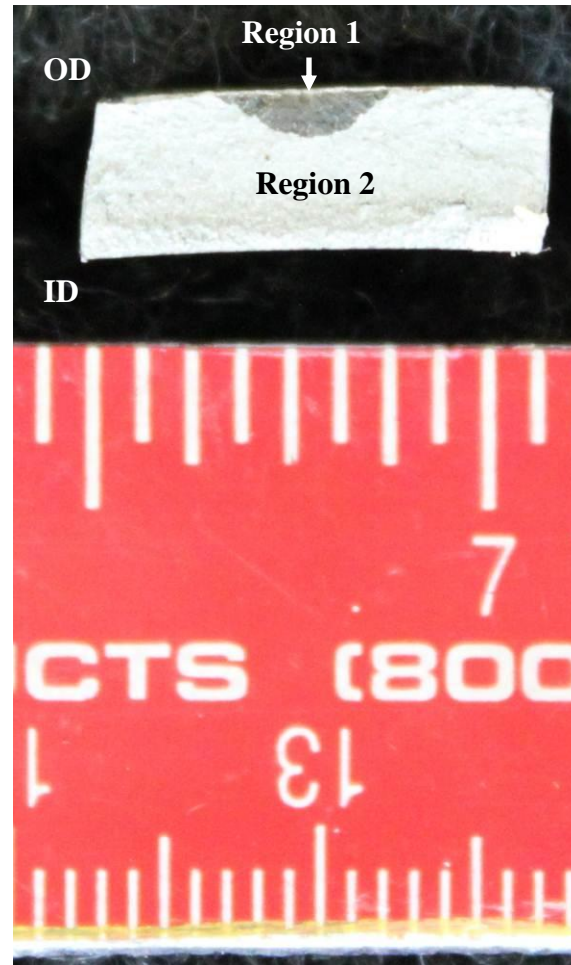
Photograph of the fracture surface from Crack Colony 7.
